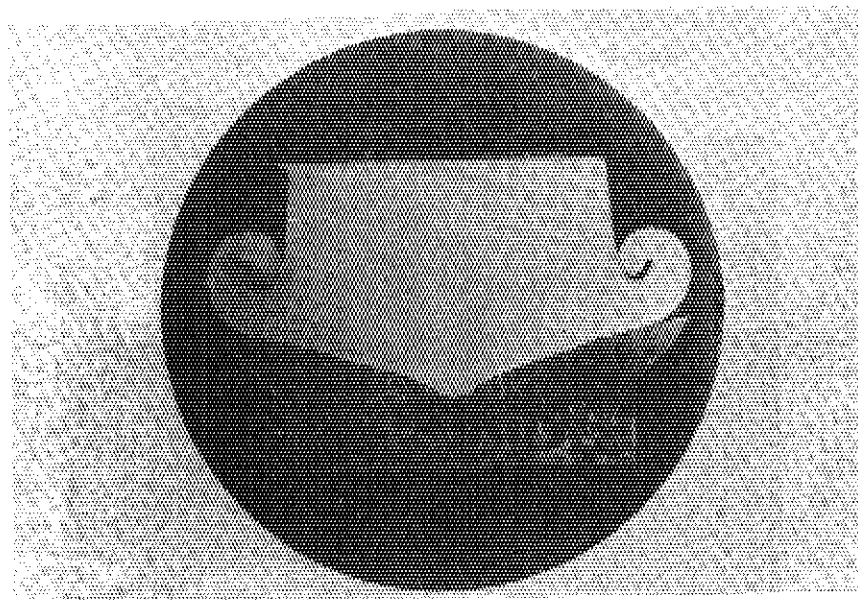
Photograph of transverse section of interface of the transition joint (Specimen No. 21)
